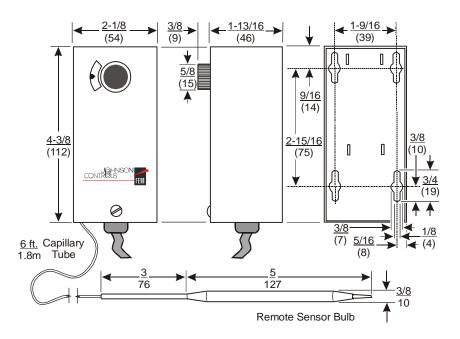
A19AAT-2C Model Thermostat Dimensions, in. (mm)
